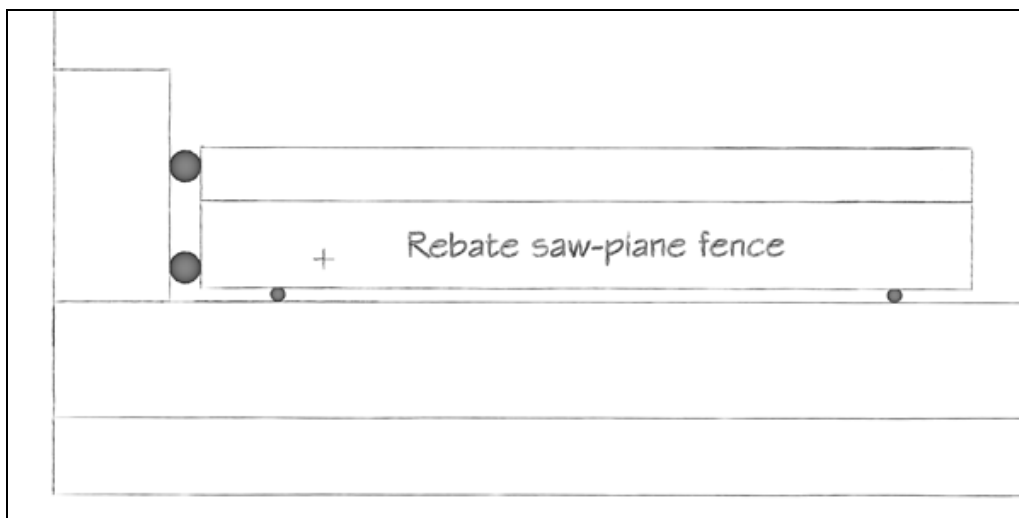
Place the $13/32$ " ball bearings between the end of the saw-plane fence and the fixture fence. The $3/16$ " ball bearings go between the face of the saw-plane fence and the other fixture fence.
